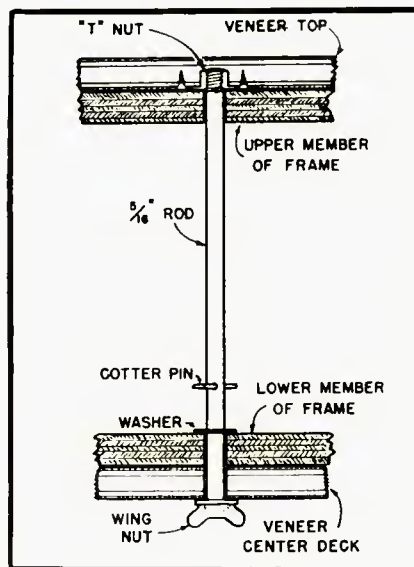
Method of fastening the top to the superstructure without exposed screws to mar the appearance.
